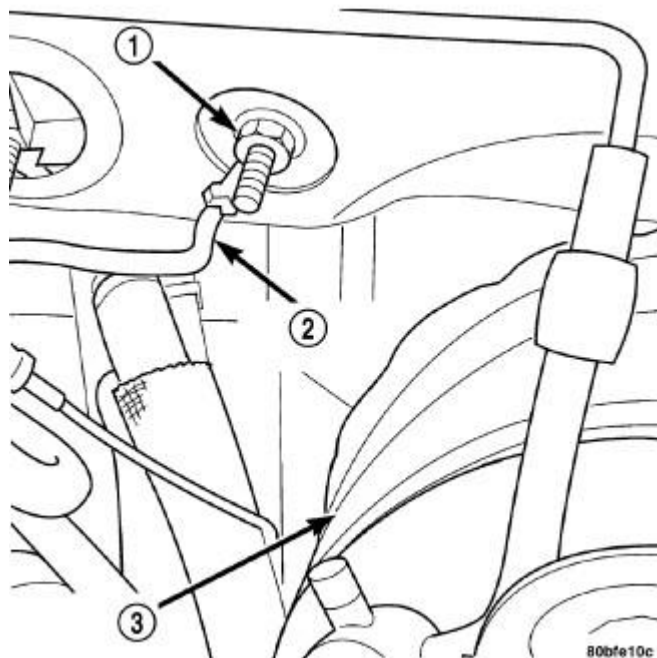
Removal/Installation Body Ground Strap-Left Side
